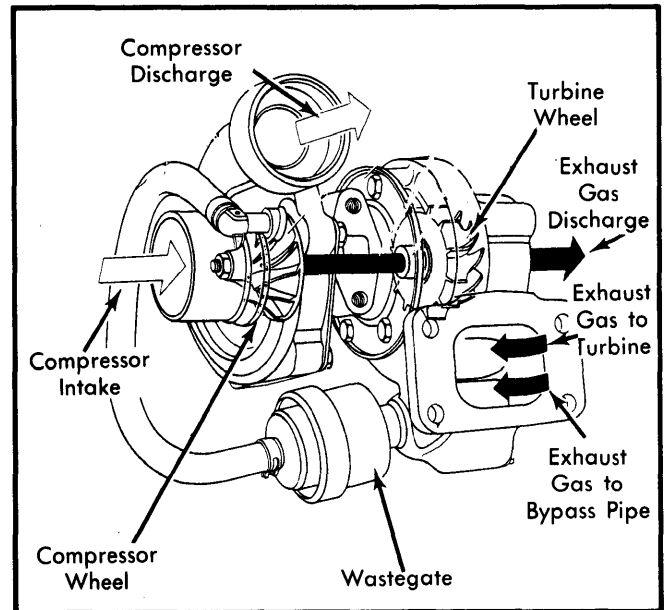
Cutaway View of Garret Turbocharger Used in Mercedes 300 SD
